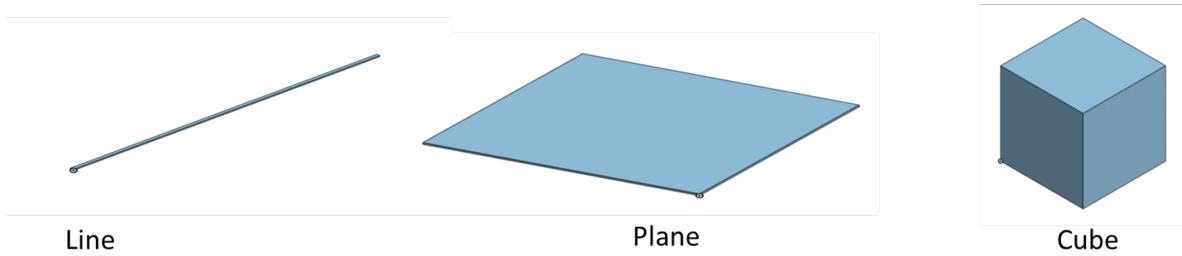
Dimensions and CAD models of the geometries used for parameters optimization.
